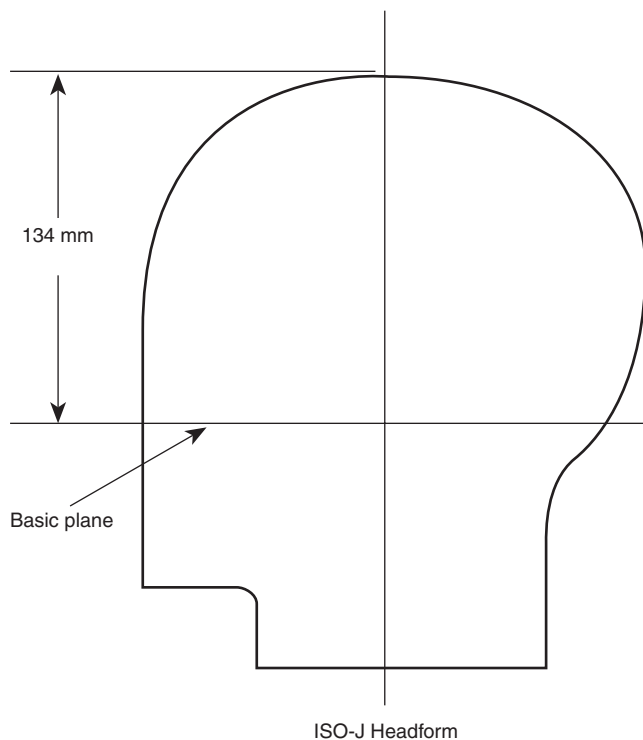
ISO Size J headform (all dimensions in mm).
